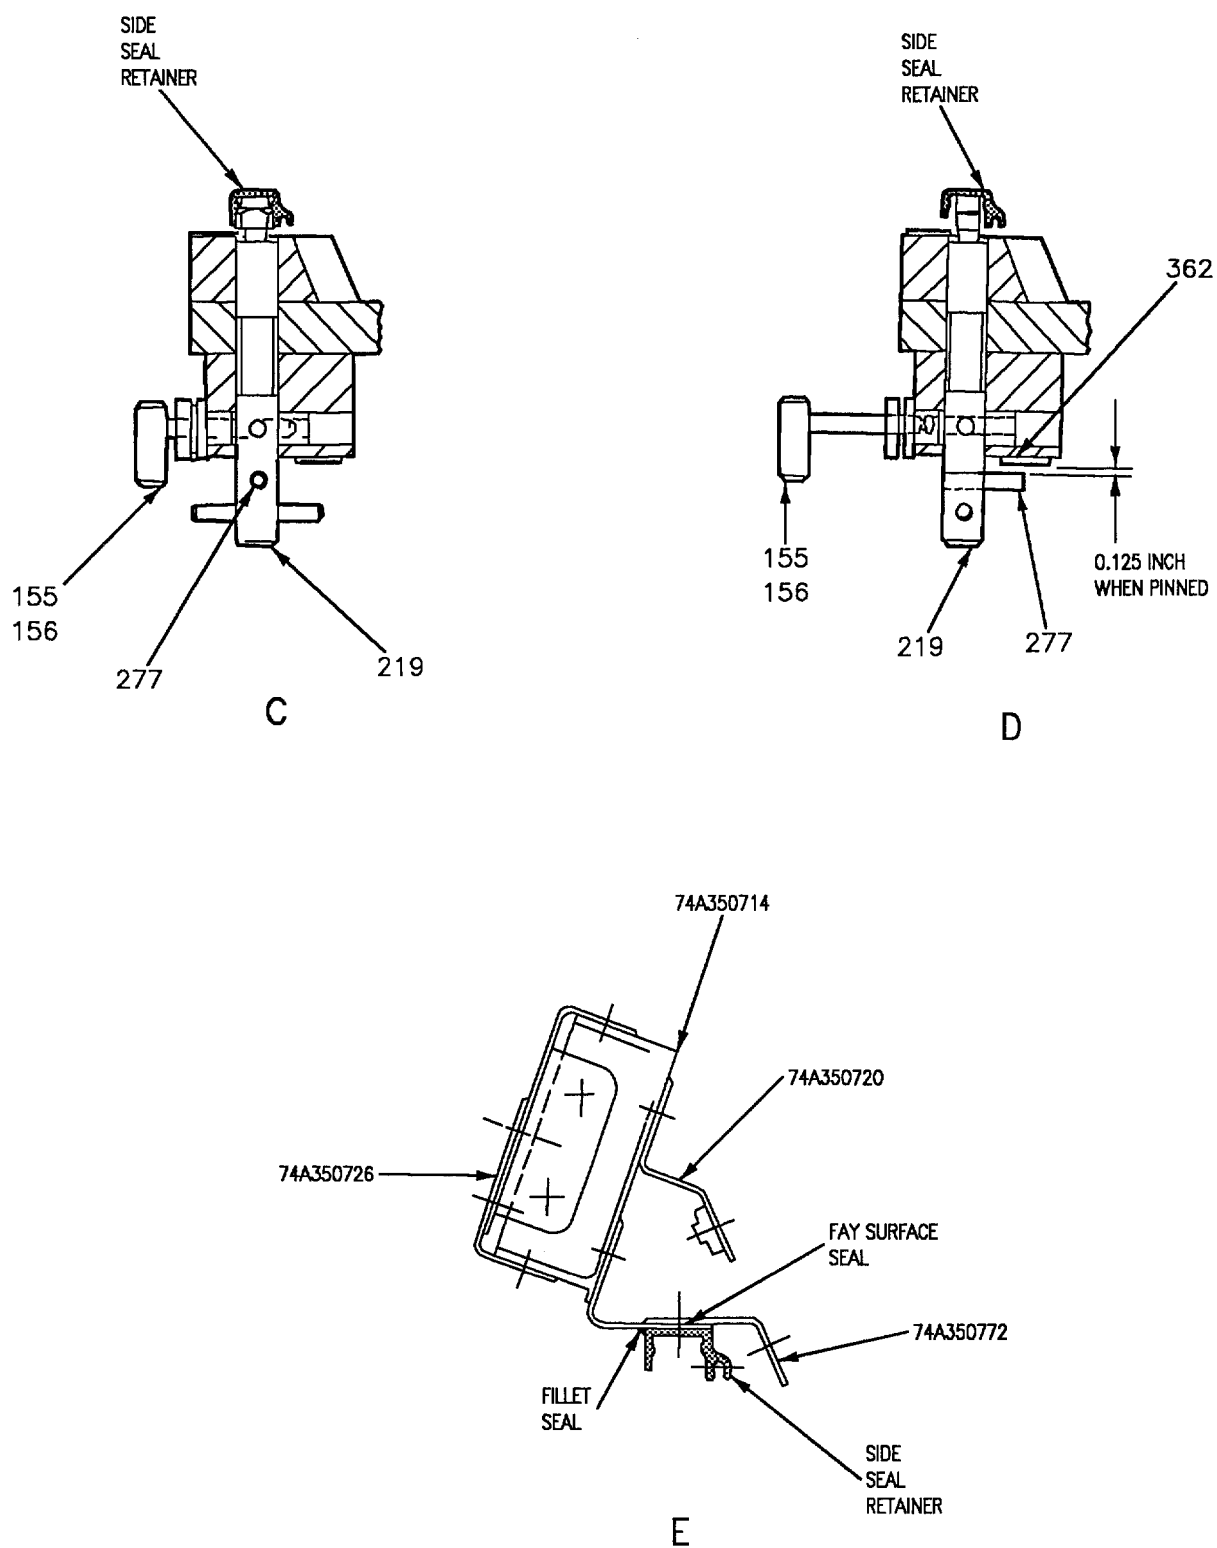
Inspection or Replacement - Side Seal Retainer (Sheet 3)
